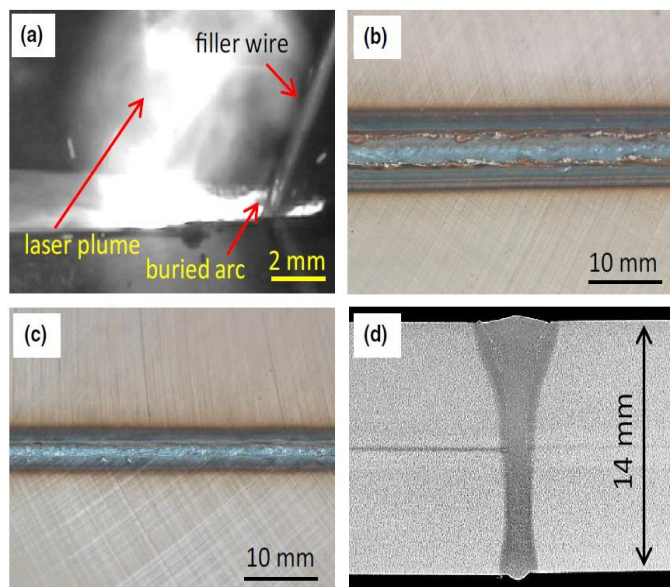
Hybrid welding of 14 mm thick joint (a) high speed camera observation of droplet transfer mode (b) top surface appearance of welded joint (c) bottom surface appearance of welded joint (d) cross sectional macrostructure of weld fusion zone [11]
